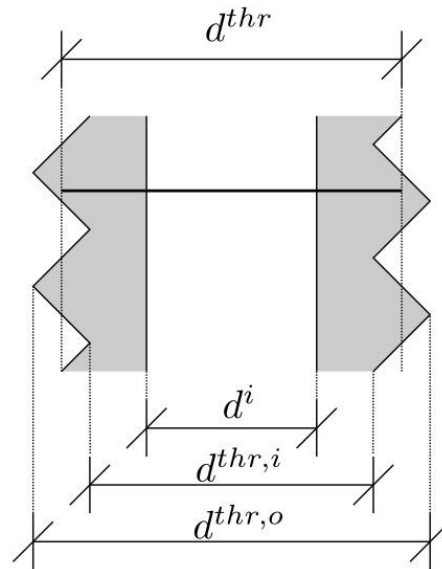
Screw diameters: Outer thread diameter  $d^{thr,o}$ , inner thread diameter  $d^{thr,i}$ , inner hollow diameter  $d^i$  and average thread diameter  $d^{thr}$
